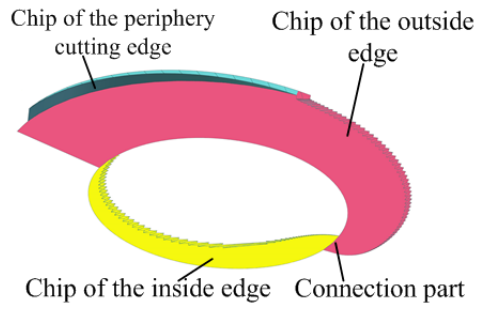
Undeformed chip geometry formed by helical milling specialized tool
